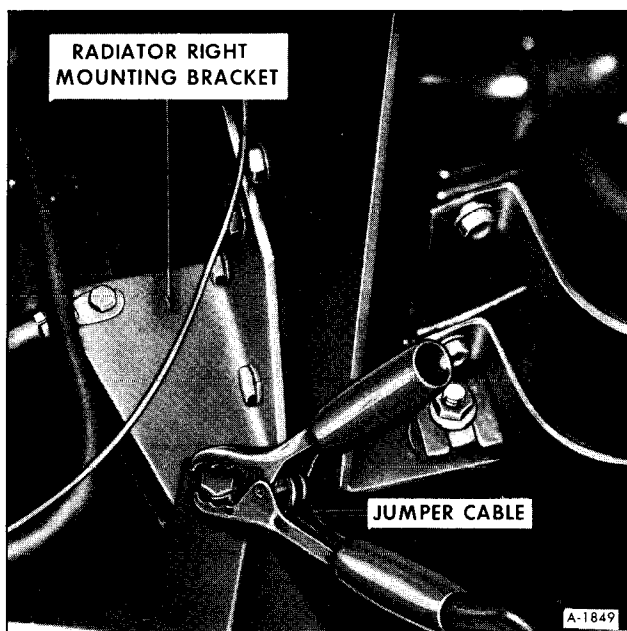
Connecting Jumper Cable to Right Radiator Mounting Bracket
